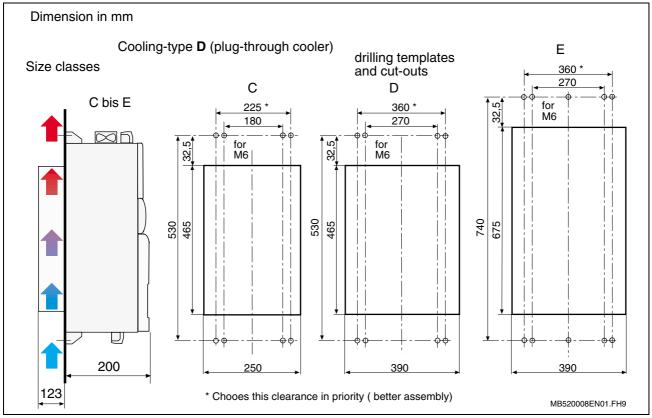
Dimension sheet for cooling type D, size classes C, D, E
